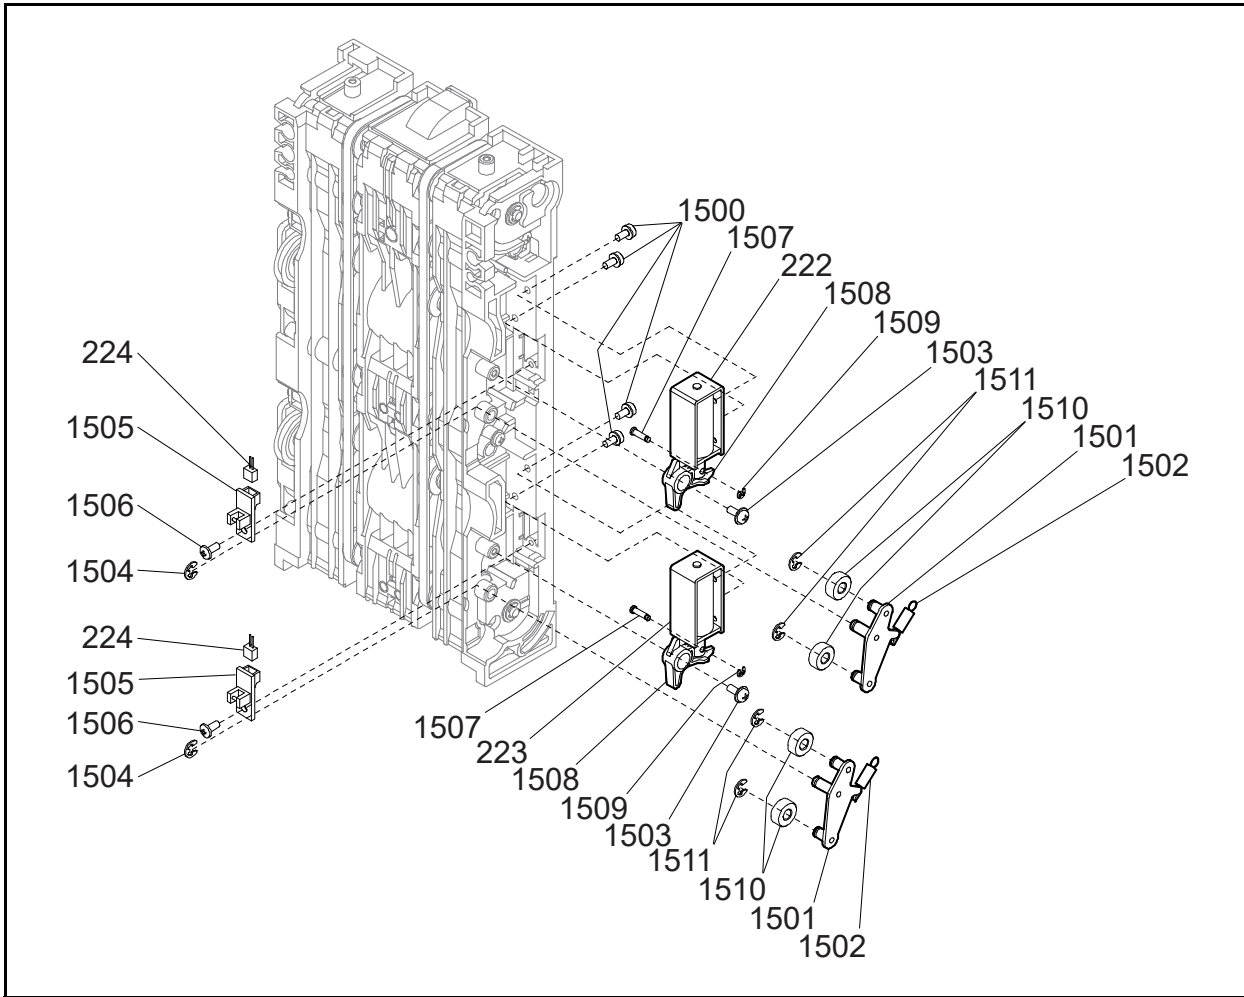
iPRO-RC Rear Transport Assembly 5 Exploded View
